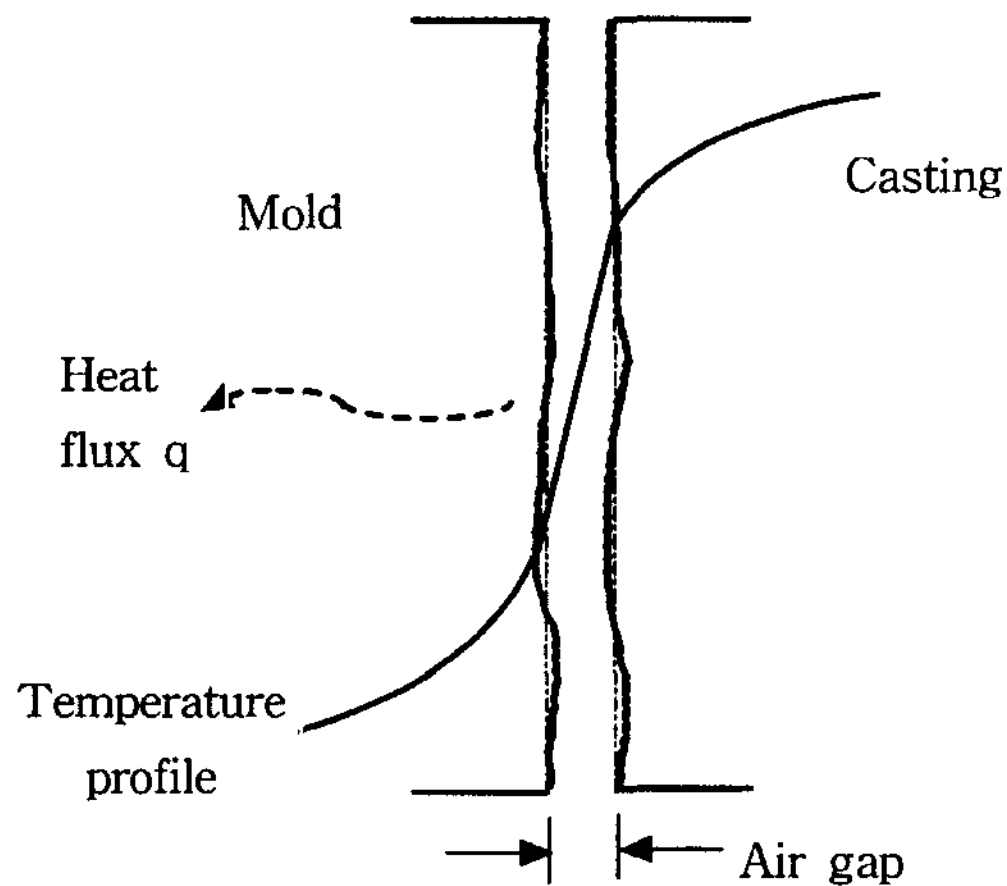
Nature of the Thermal contact between the mold and the casting.
